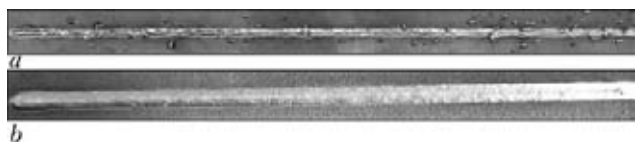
Spatters on of about 150 mm welds in Nd:YAG laser welding at $v_w = 4$ m/min and focal point position $f = 0$ (a) and 3 (b) mm
